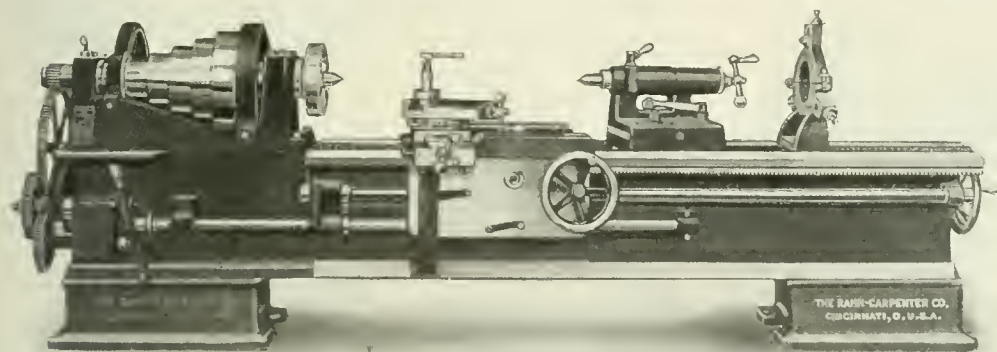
Rahn-Carpenter 24- and 43-inch Extension-bed Gap Lathe
